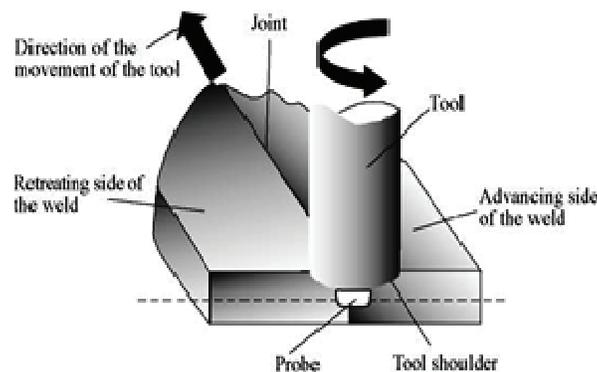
Two discrete metal work pieces butted together, along with the tool (with a probe).
